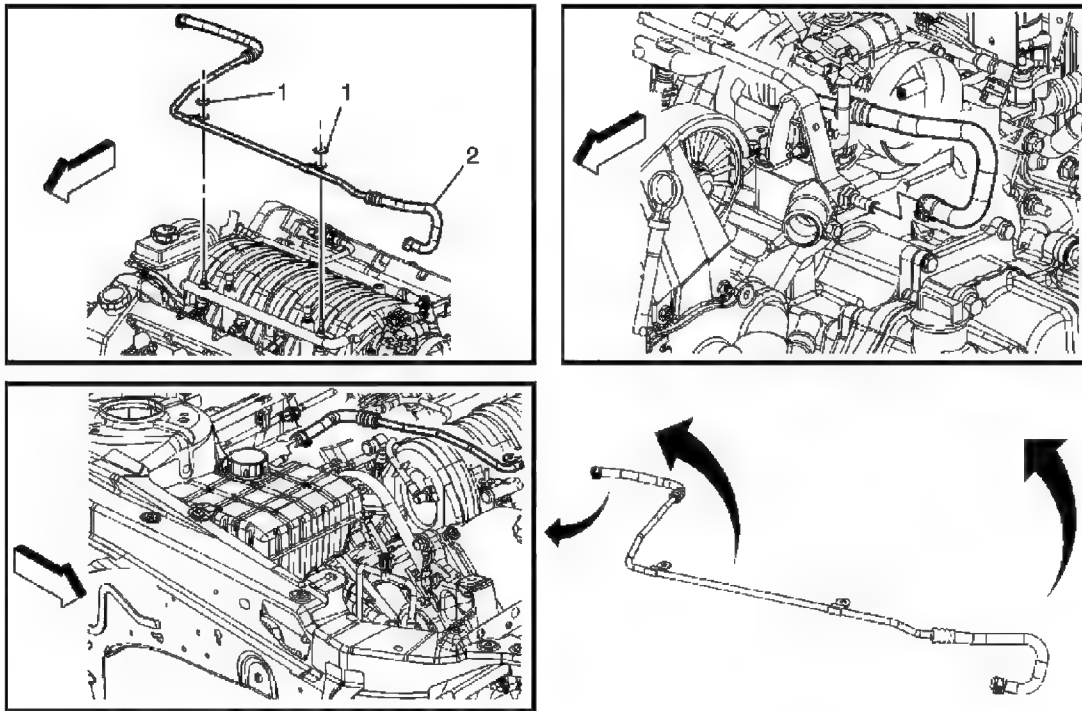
Identifying Radiator Surge Tank Inlet Hose/Pipe (LD8)
